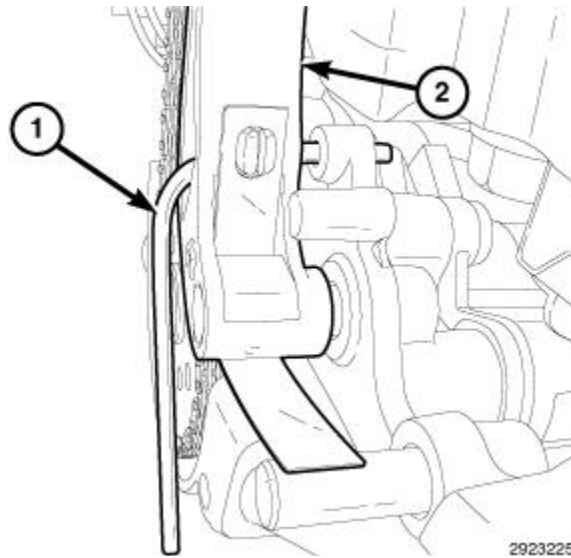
Oil Pump Chain Tensioner & Retaining Pin
